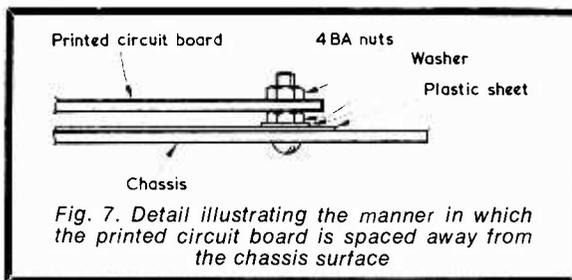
Detail illustrating the manner in which the printed circuit board is spaced away from the chassis surface
